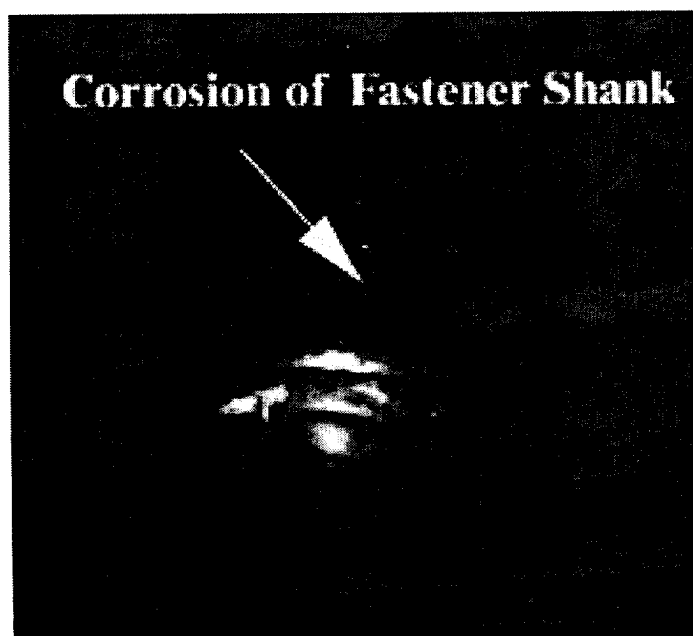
Corrosion of ALH fastener shank with incomplete embedment
